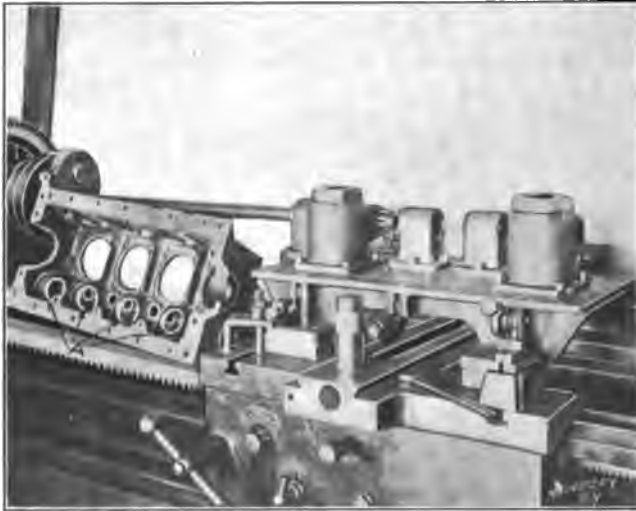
Fixture for Boring Cam-shaft Bearings in Engine Frame
